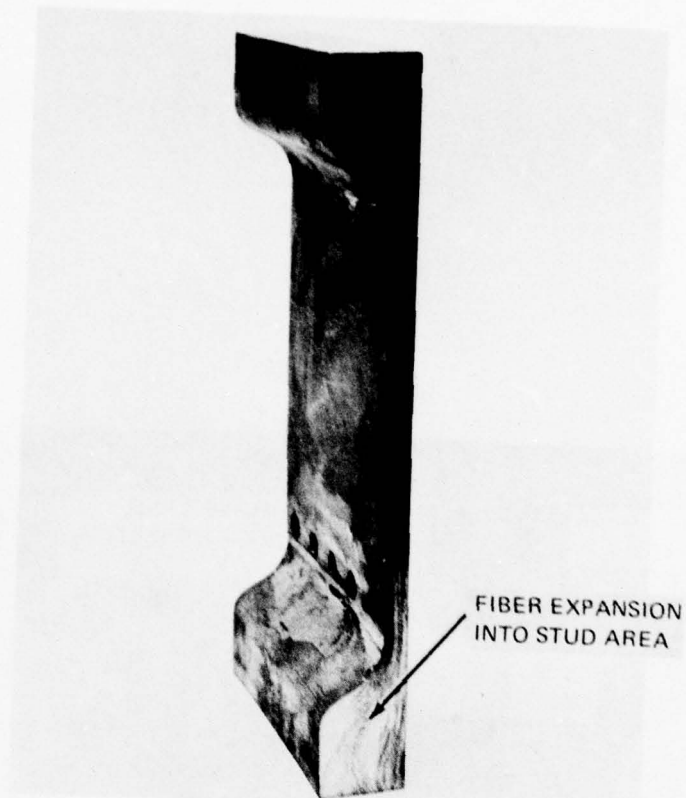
Fiber FP/Magnesium Outer-Rim Cross-Section Specimen.
